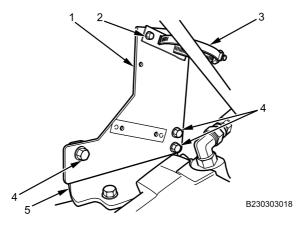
Ether (Cold) Start Valve Assembly Bracket.
